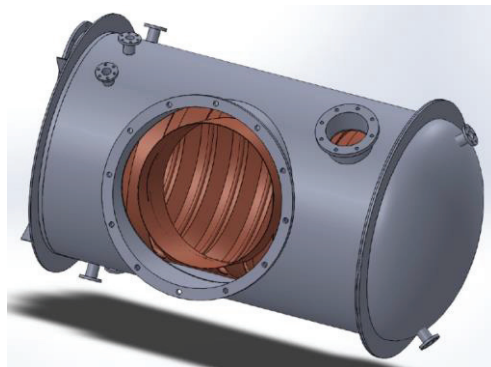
Prototype vacuum chamber with installed cryogenic shrouds
